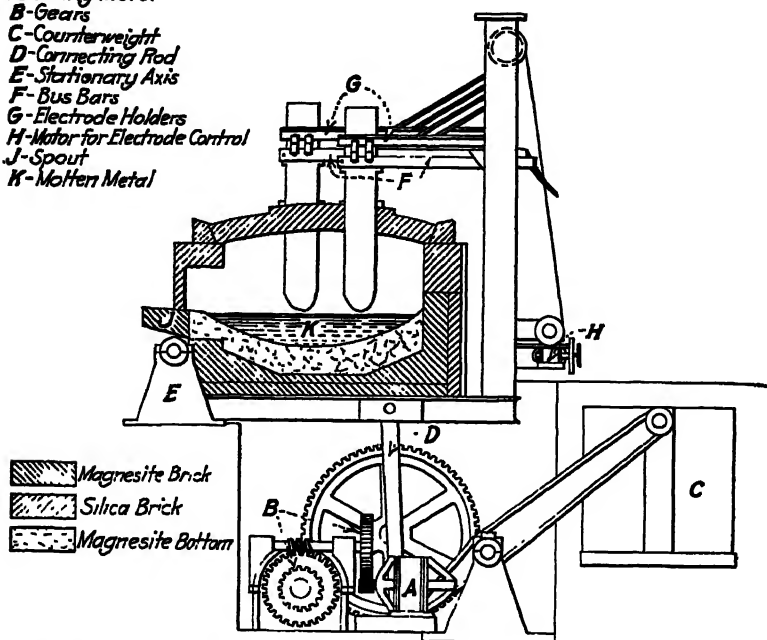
Section through a 6-ton Heroult furnace showing tilting mechanism and details of lining.
